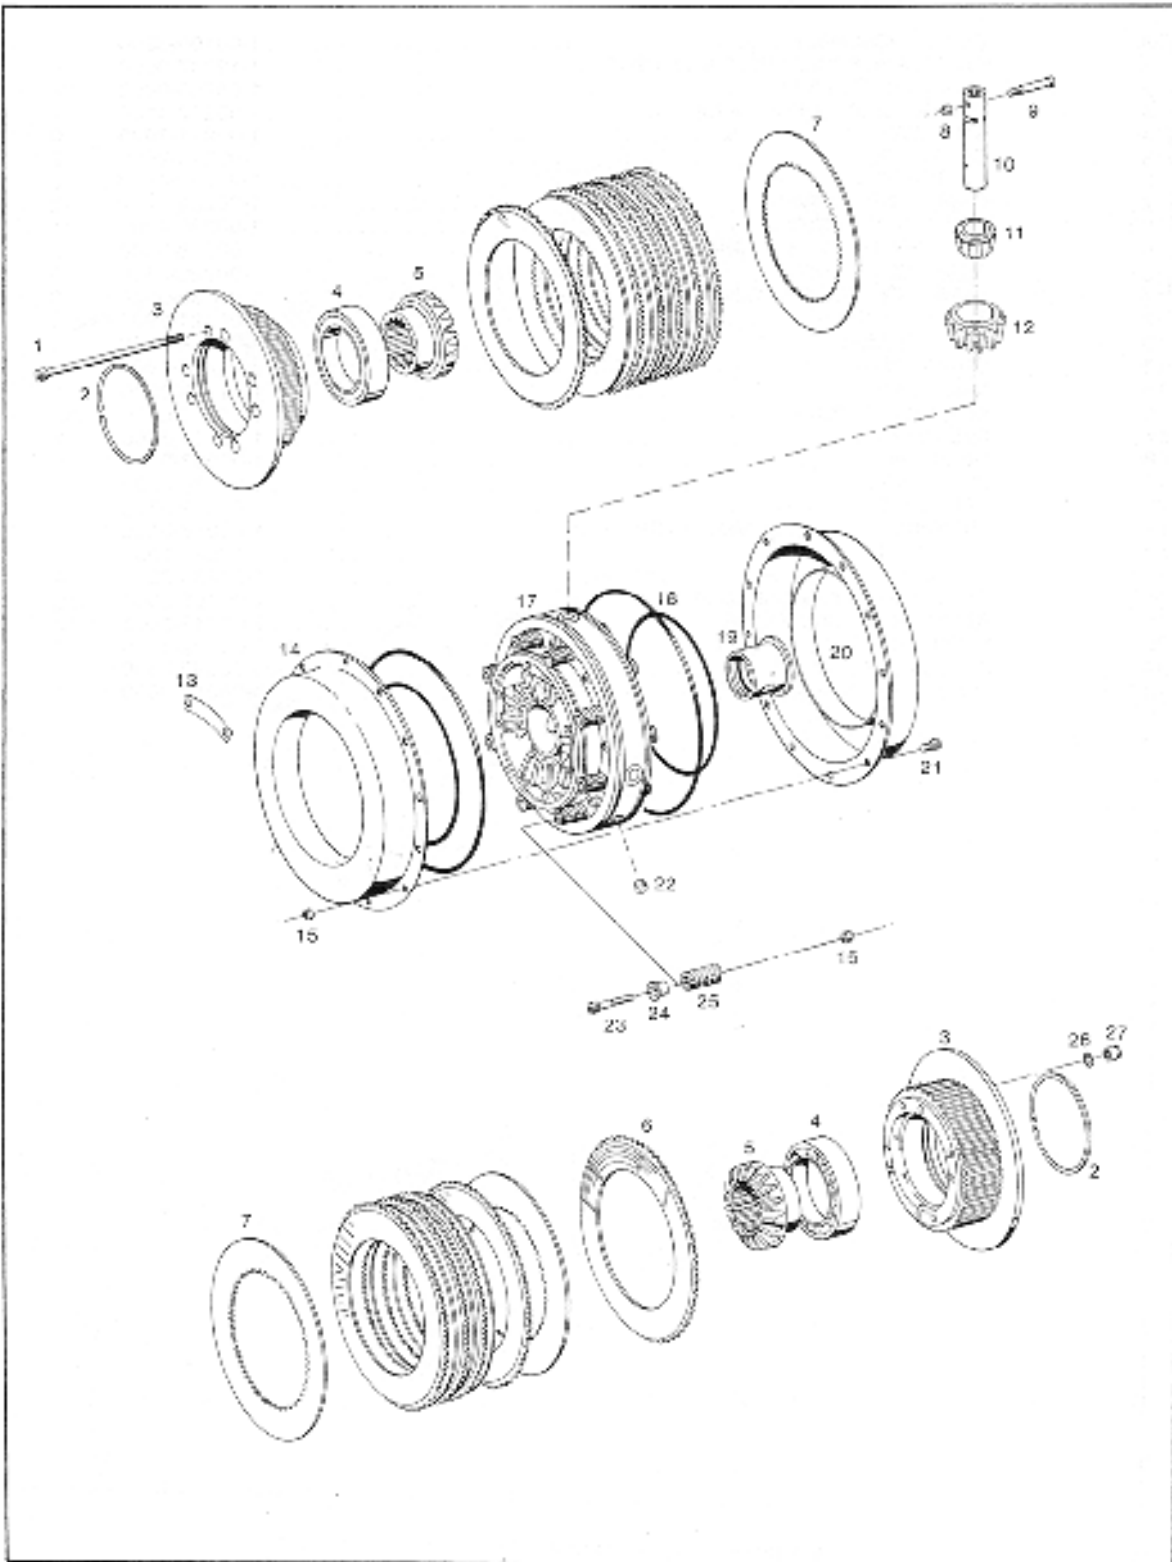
'HP'-28000 Clutch and Gear Carrier Assembly
